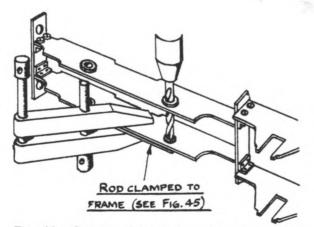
Spotting through into the coupling rod blank through axle bushes.
